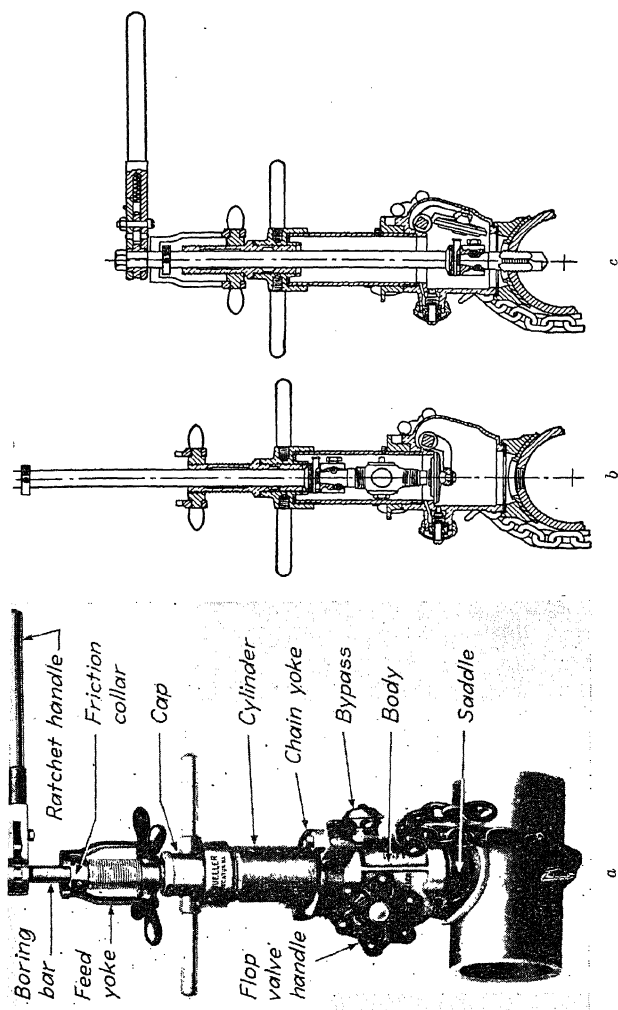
Tapping machine for installing corporation cocks in water mains under pressure. Left, external view; right, drilling and tapping operation; center, corporation cock entering through water lock. (Courtesy of the Mueller Company, Decatur, Ill.)
